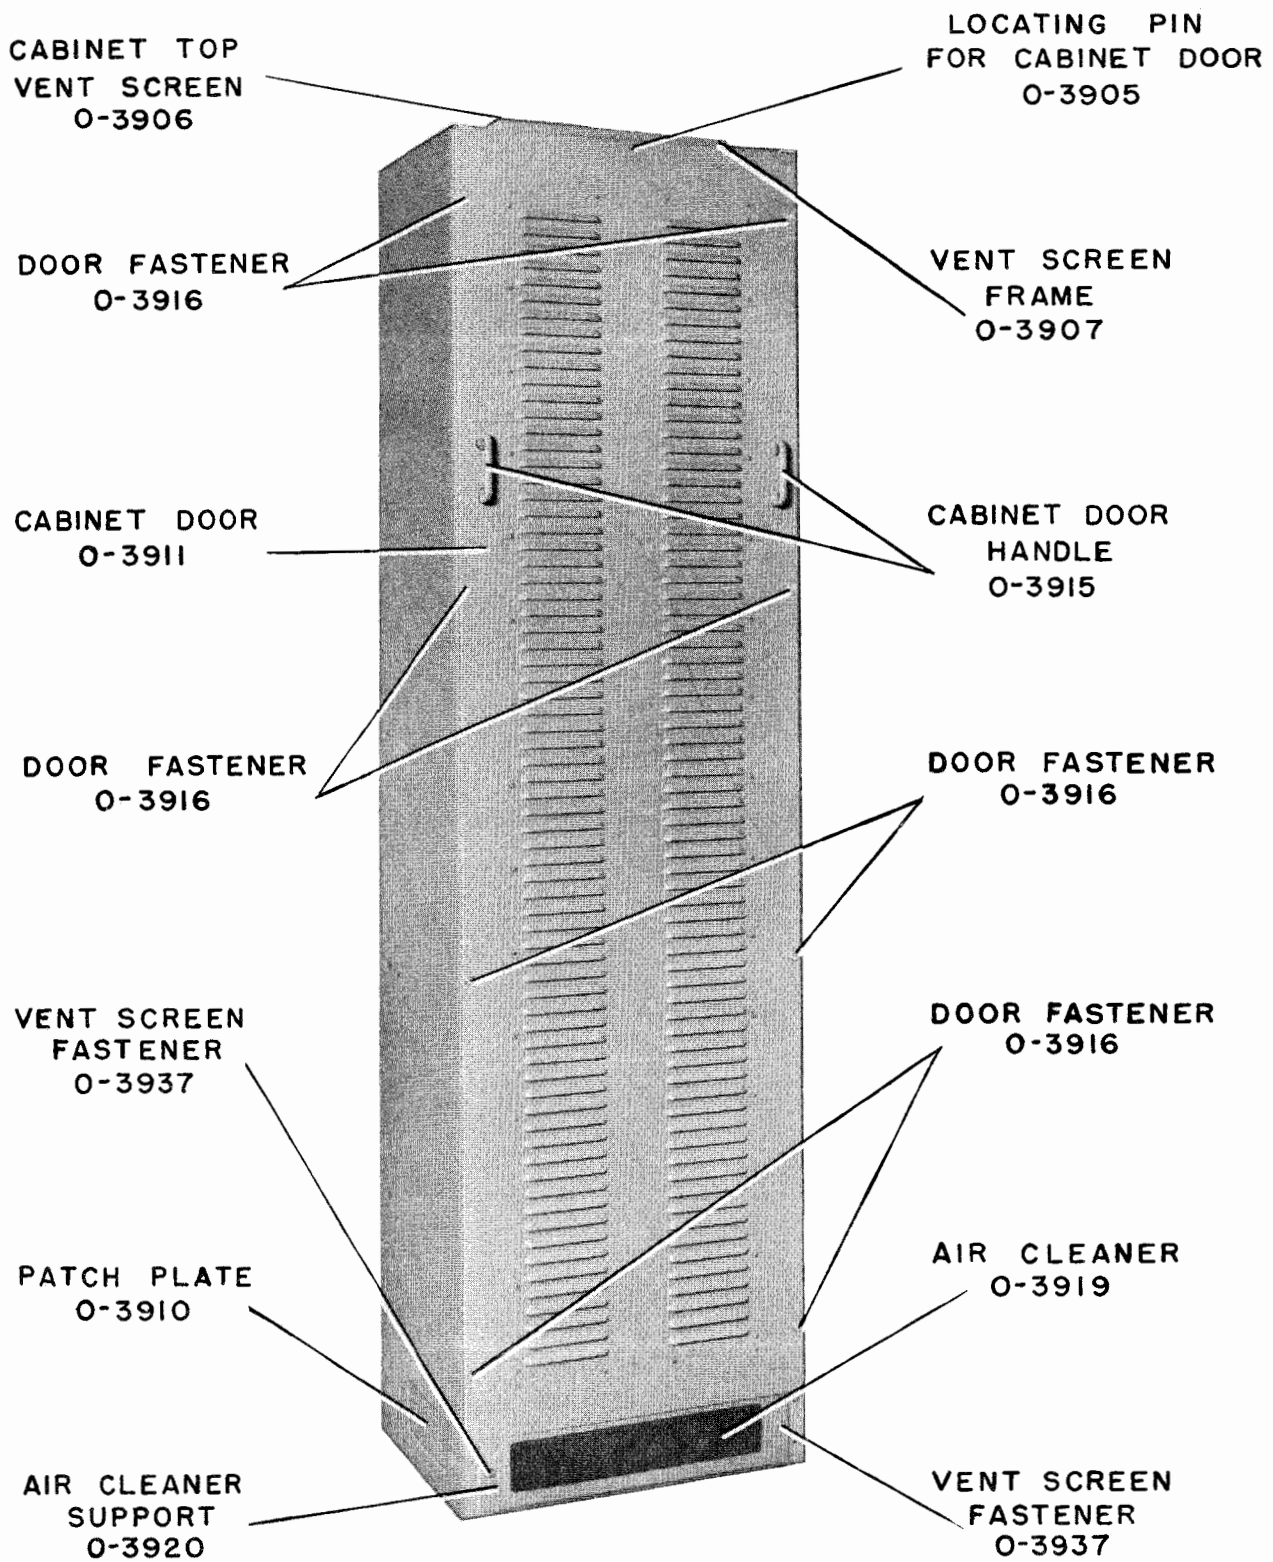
Component Locations Rear View, Cabinet CY-860/FRR-24
